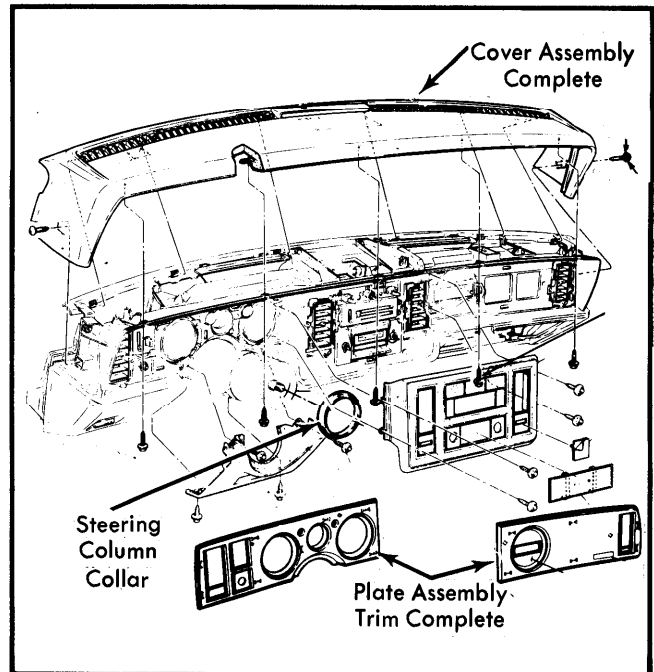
Electra, LeSabre & Estate Wagon Instrument Panel Assembly
